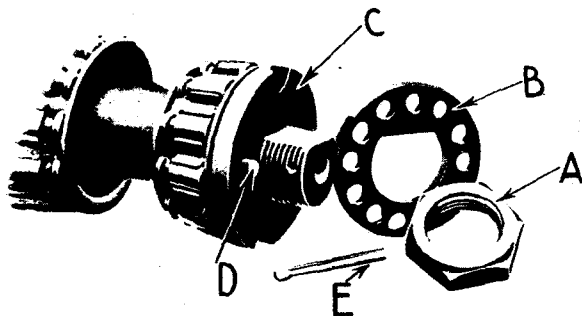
Front Wheel Bearings and Adjusting Nuts.
